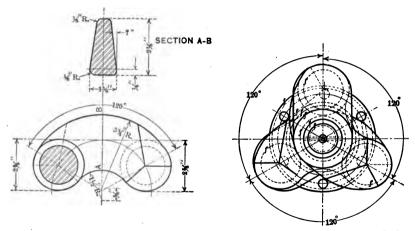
Section and end view of Haynes light-six motor crankshaft $(3\frac{1}{2}" \times 5")$.
